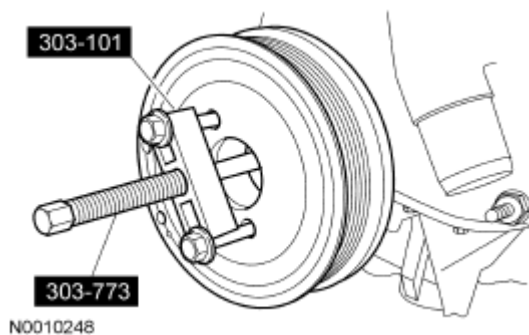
Identifying Special Tools And Crankshaft Pulley
